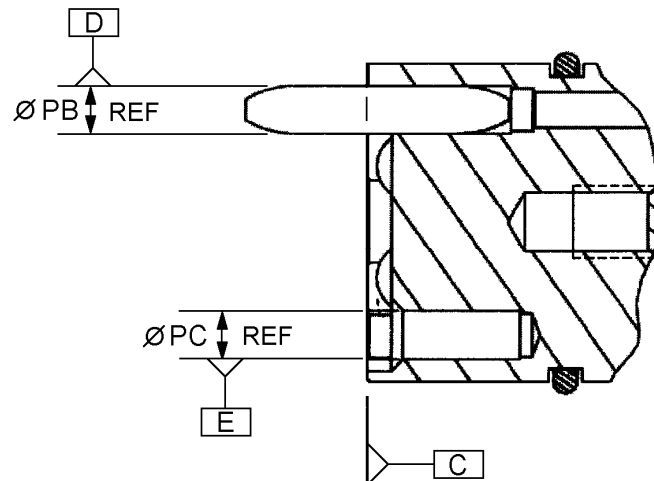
Plug interface dimensions, coupling nut fully retracted (section view A-A, see figure 5).
